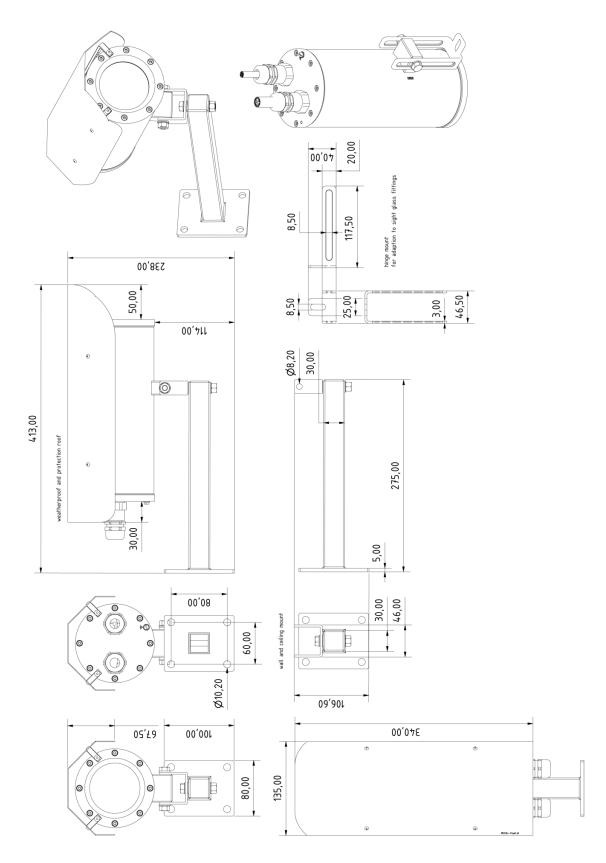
Dimensions of the T08 ExCam IP135x with accessories
